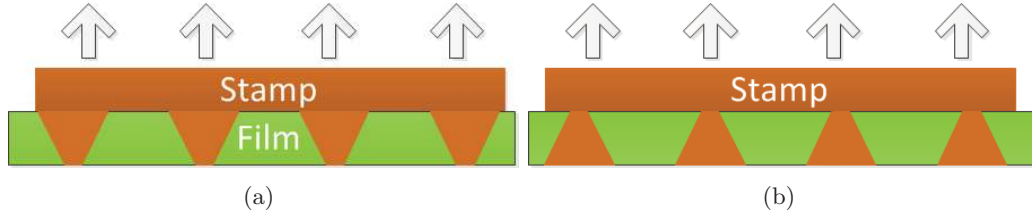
a) shows an example of sloped sidewalls on a stamp that allows for separation. b) shows an example of sloped sidewalls acting as hooks, not allowing for separation.
